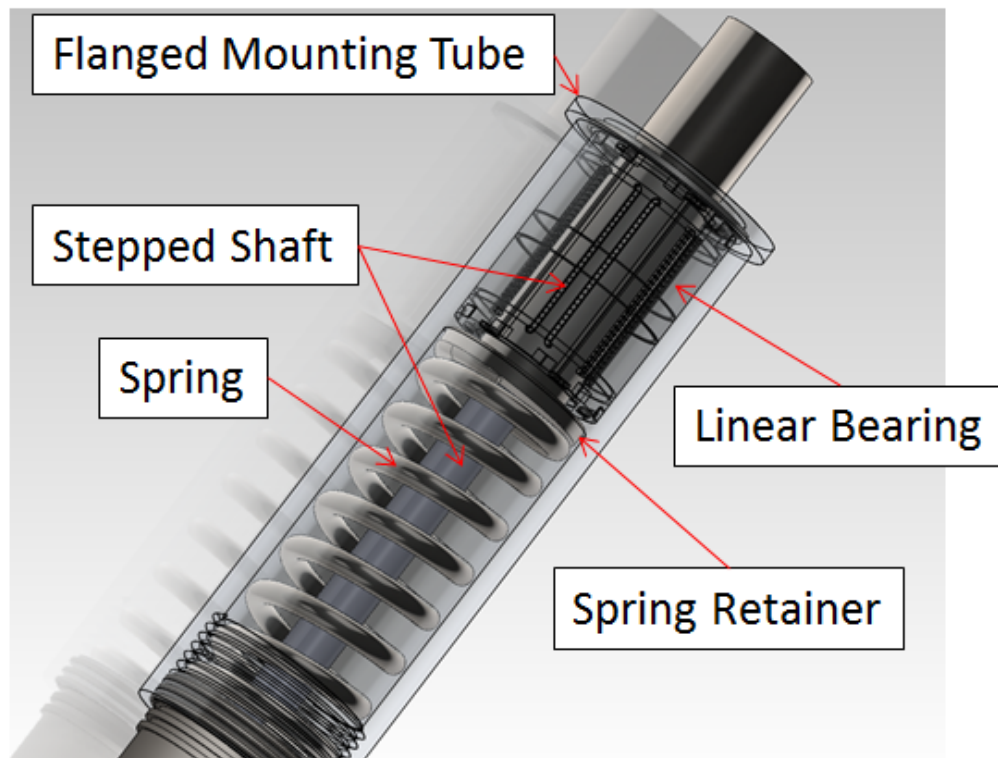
Flanged Mounting Tube with Stepped Shaft, Spring, Spring Retainer and Linear Bearing
